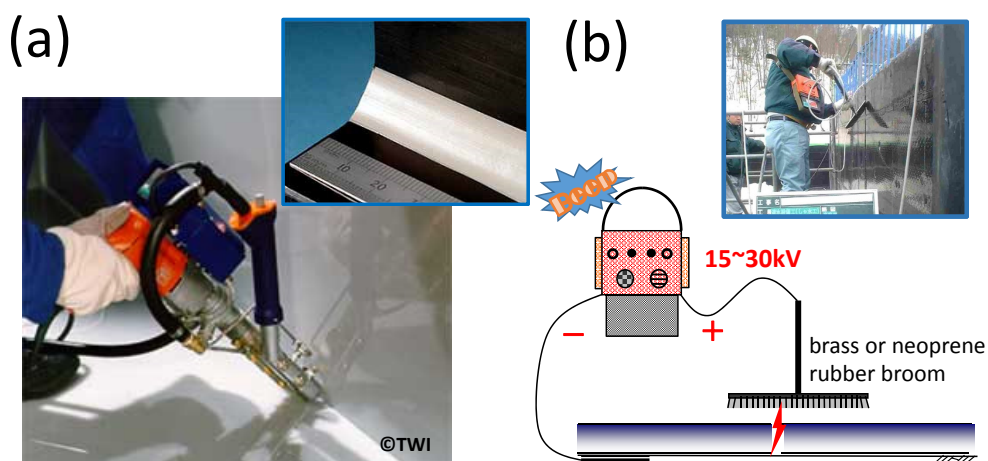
(a) The extrusion welding and a welded seam. (b) The high-voltage pin-hole test.
